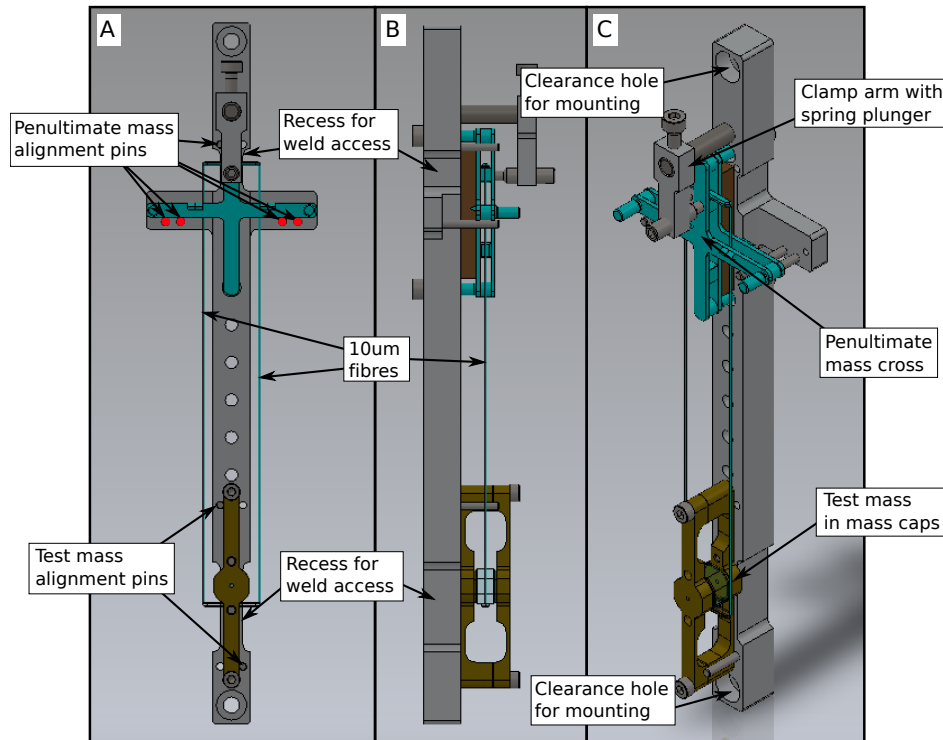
Computer-aided-design model of the 1 g weld jig. Pictures A, B and C show the front, side and isometric view of the weld jig. The 1 g mass caps with the bonded mirror is fixed to the weld jig by two screws and is aligned to two pins in order to avoid rotation of the mirror. The penultimate mass is aligned to five pins in order to align bottom and top cross independently. For better weld access the jig has recesses around the area of the ears. A clamp arm with a spring plunger is used to hold the penultimate mass. The spring plunger clamps on the bonded square block and limits the pressure on this part to 4.5 N. With two screw clearances at the ends of the weld jig it can be interfaced with any weld tooling structure.
